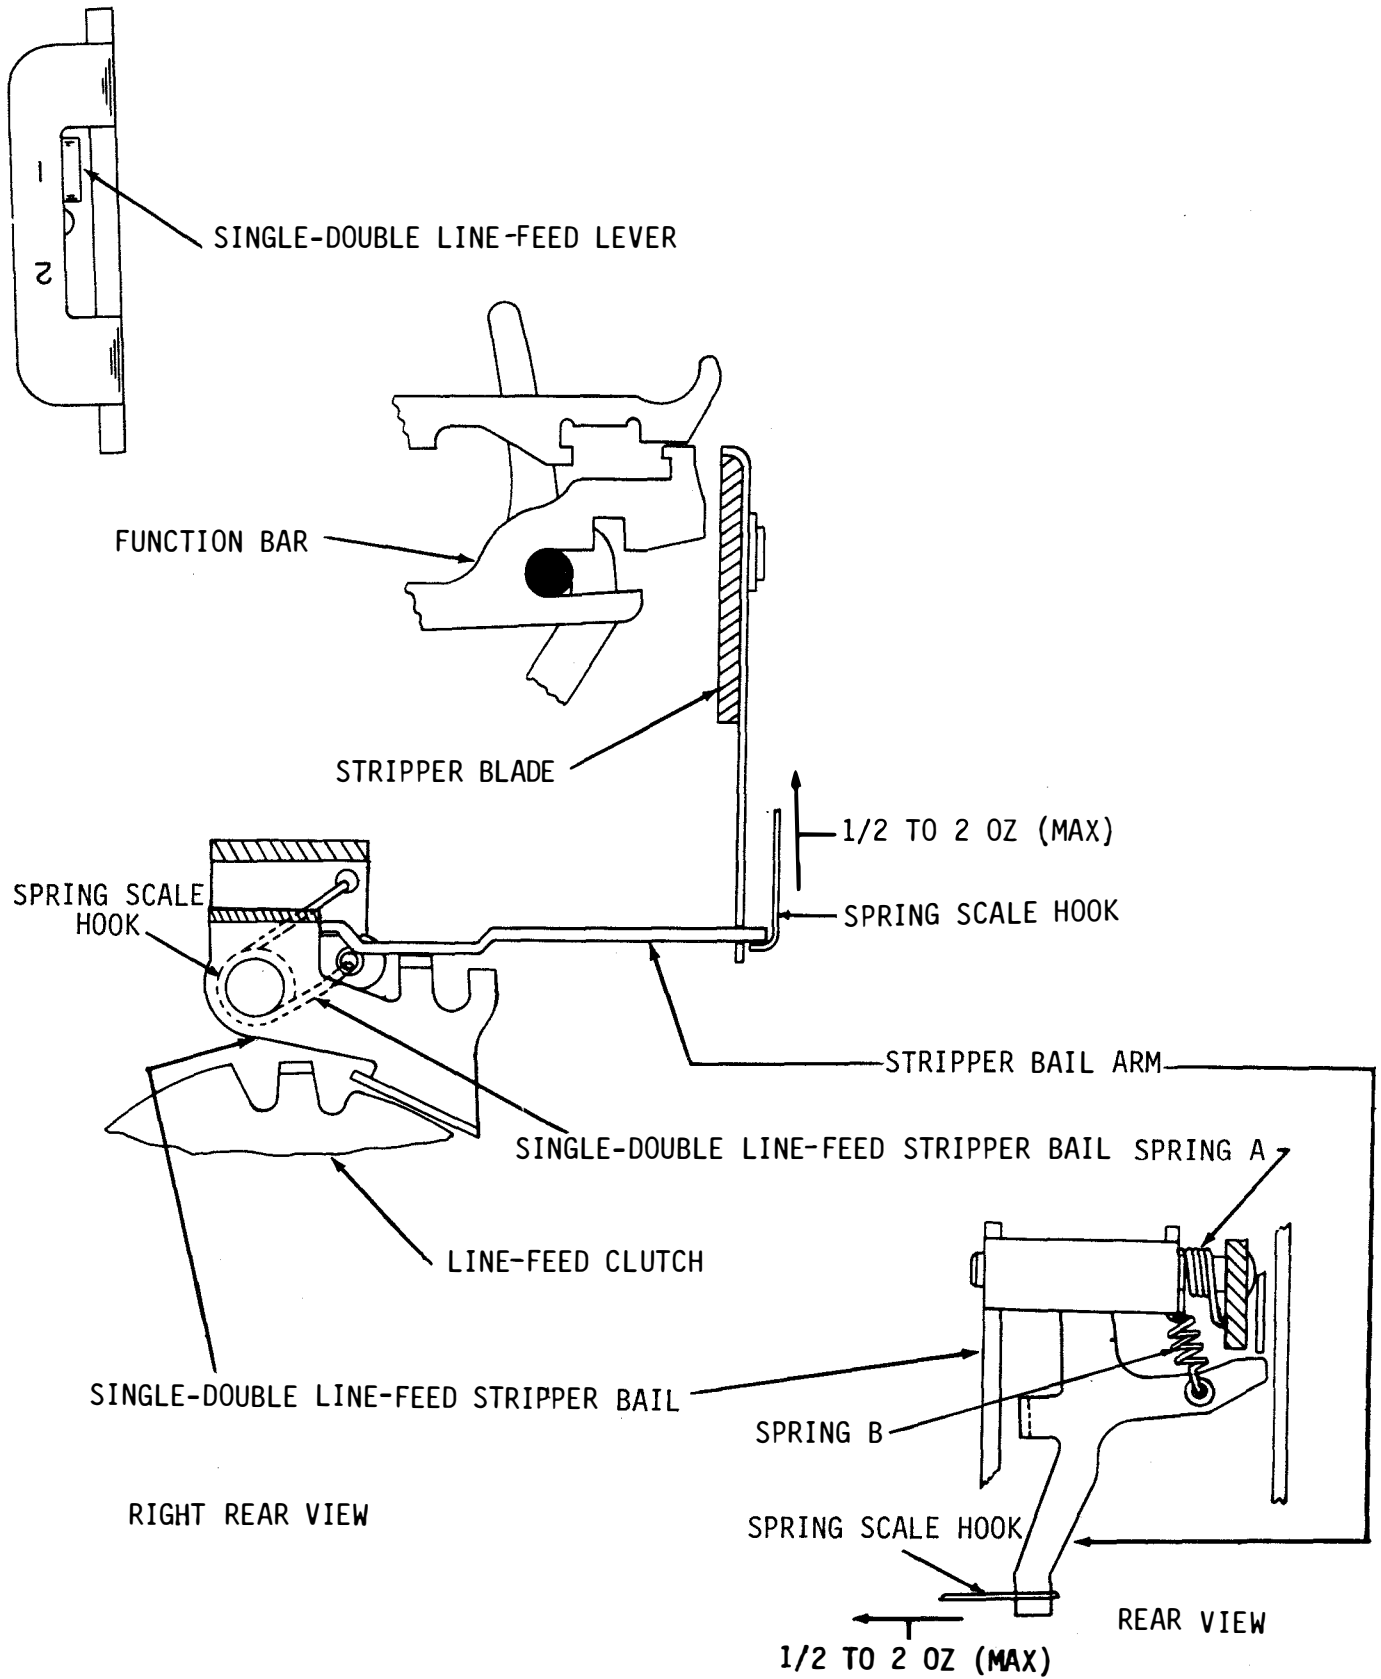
Single-Double Line-Feed Stripper Bail Assembly Springs
